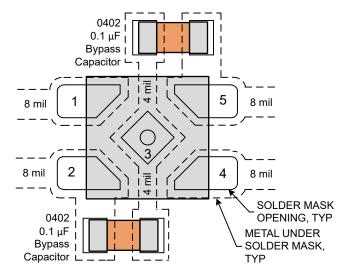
Example Layout for the DPW (X2SON-5) Package
